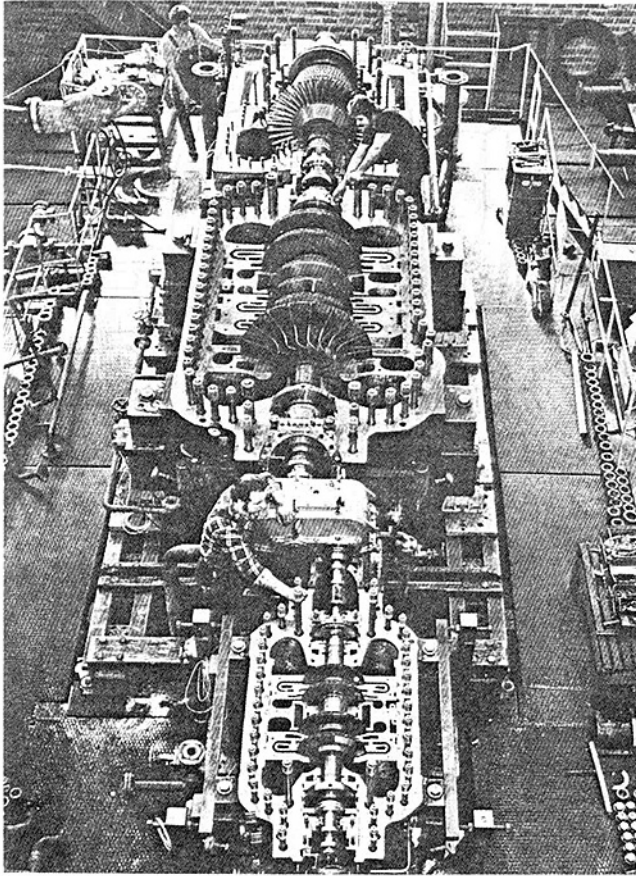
Example of a steam turbine driven two-casing air compressor with first stage open impeller (not tested)
